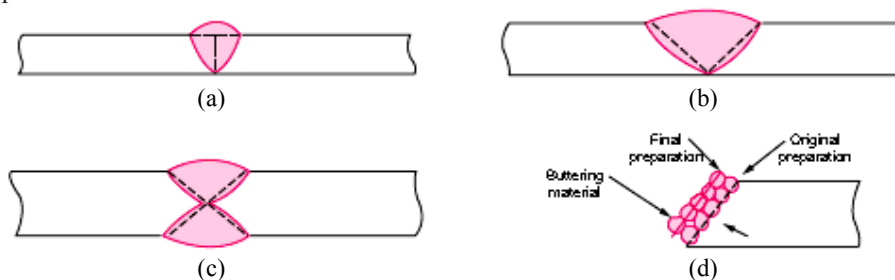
(a) Square-groove weld joint, (b) V-groove welds, (c) Double V-groove welds have much less dilution of the base materials since less welding is involved (d) Butt joints with buttering or overlaid material.
